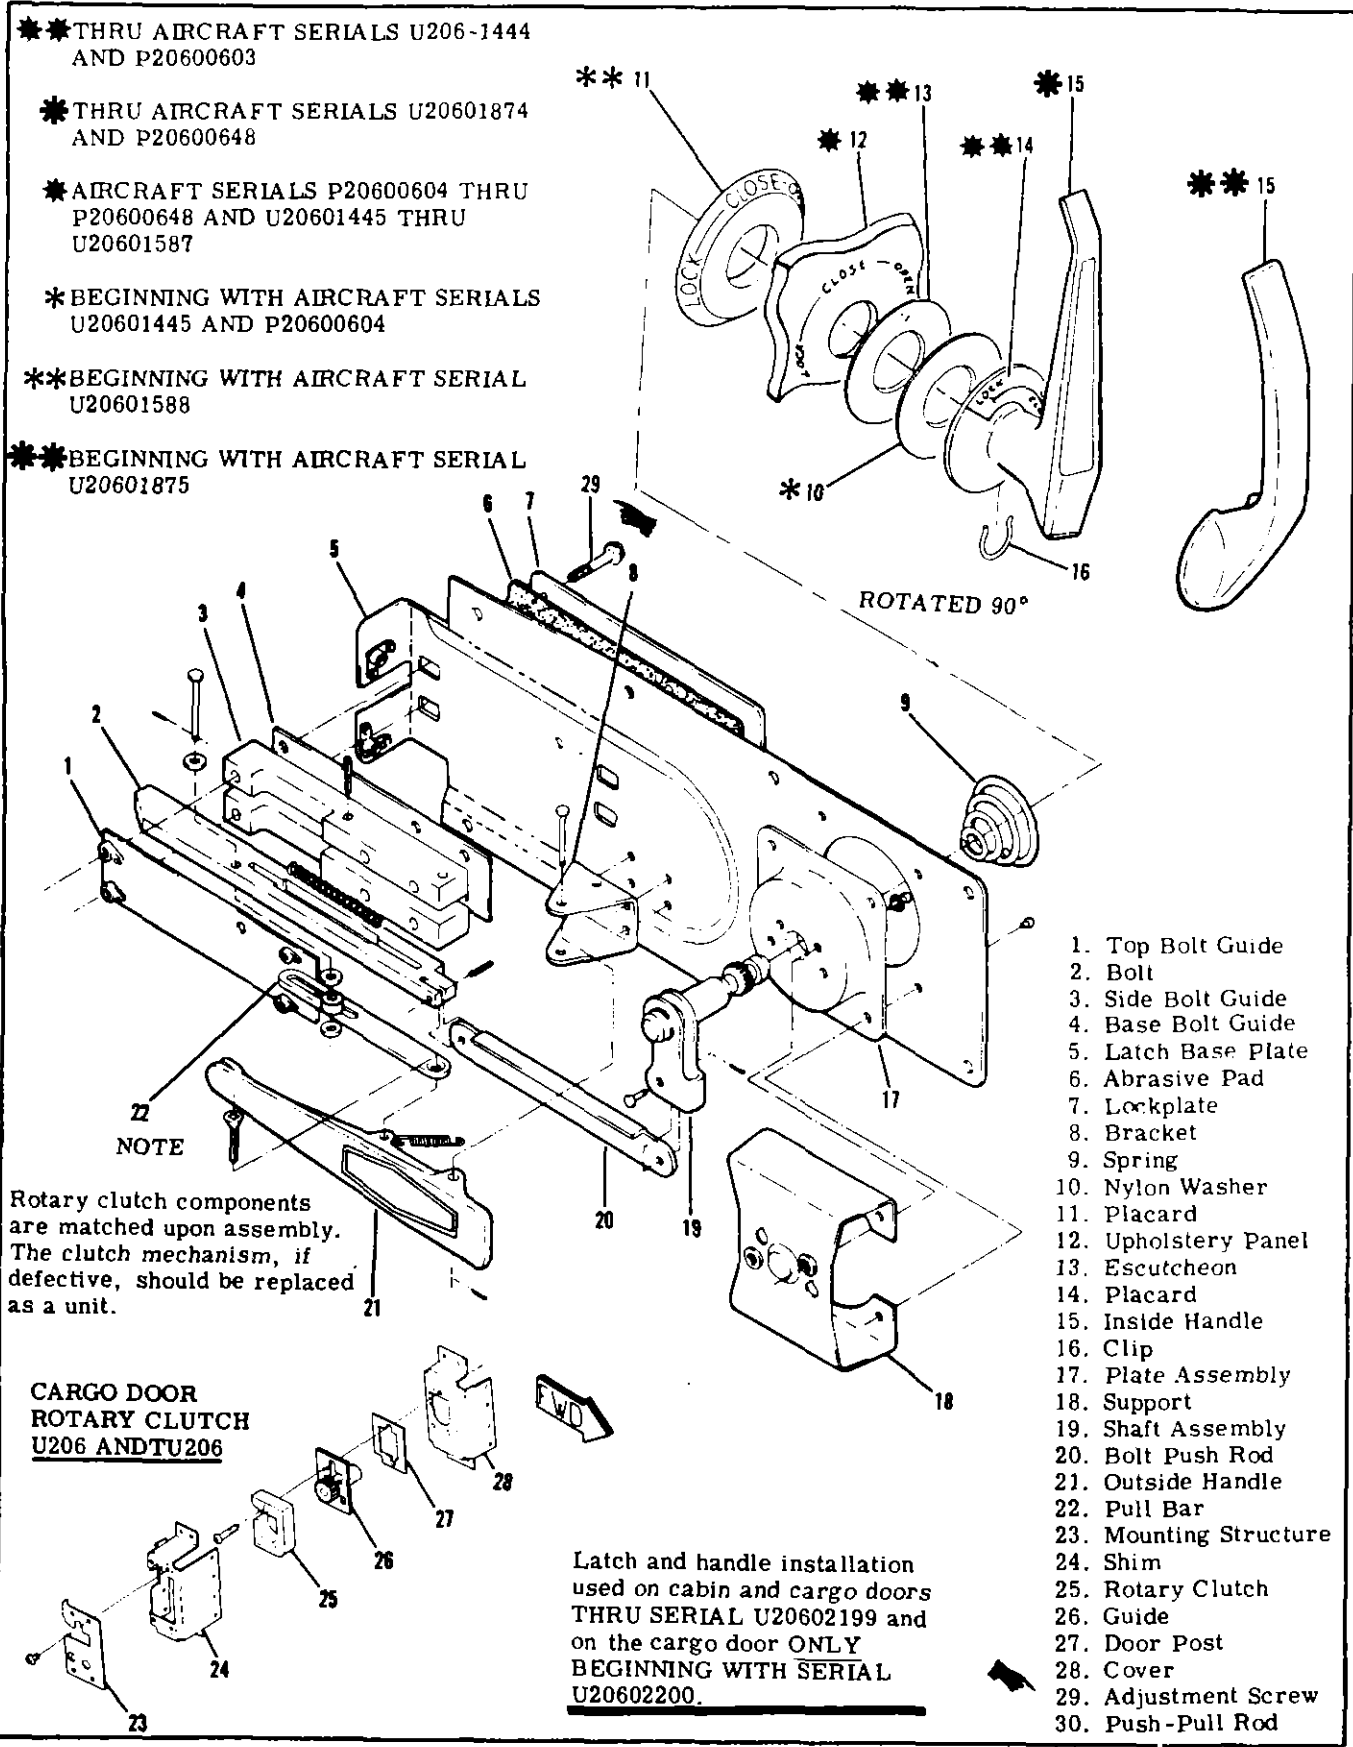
Door Latch and Rotary Clutch Components (Sheet 1 of 2)
